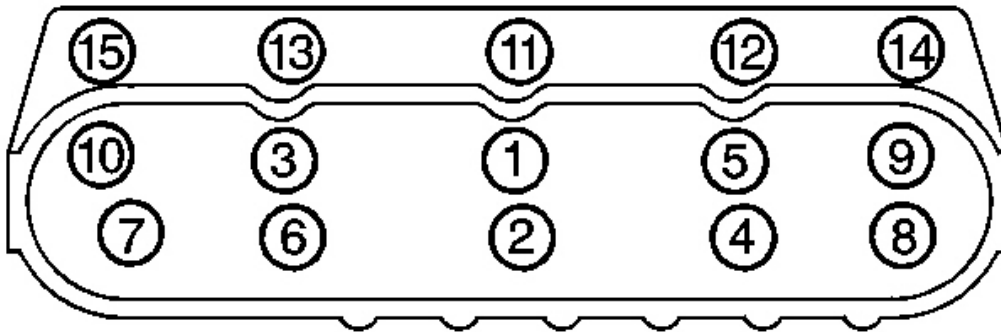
Identifying Cylinder Head Bolt Tightening Sequence
